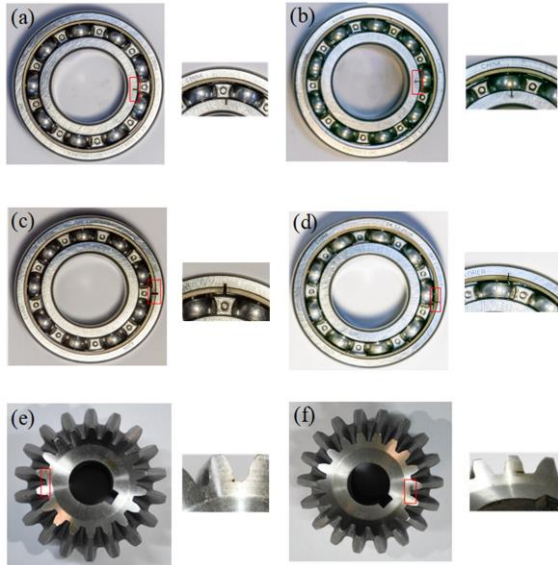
Some pictures of the tested gears and bearings in Case I: (a) Label 2; (b) Label 3; (c) Label 6; (d) Label 7; (e) Label 8; (f) Label 9.
